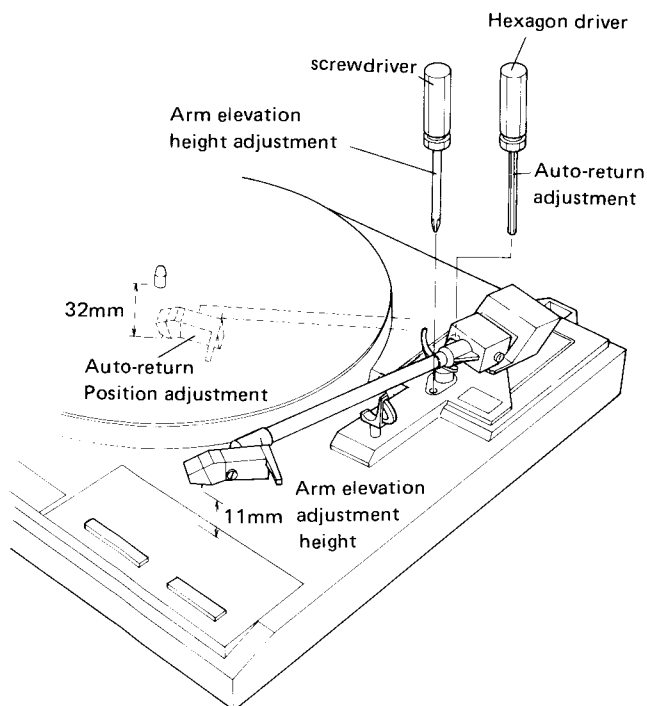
Arm elevation height adjustment and auto-return adjustment
